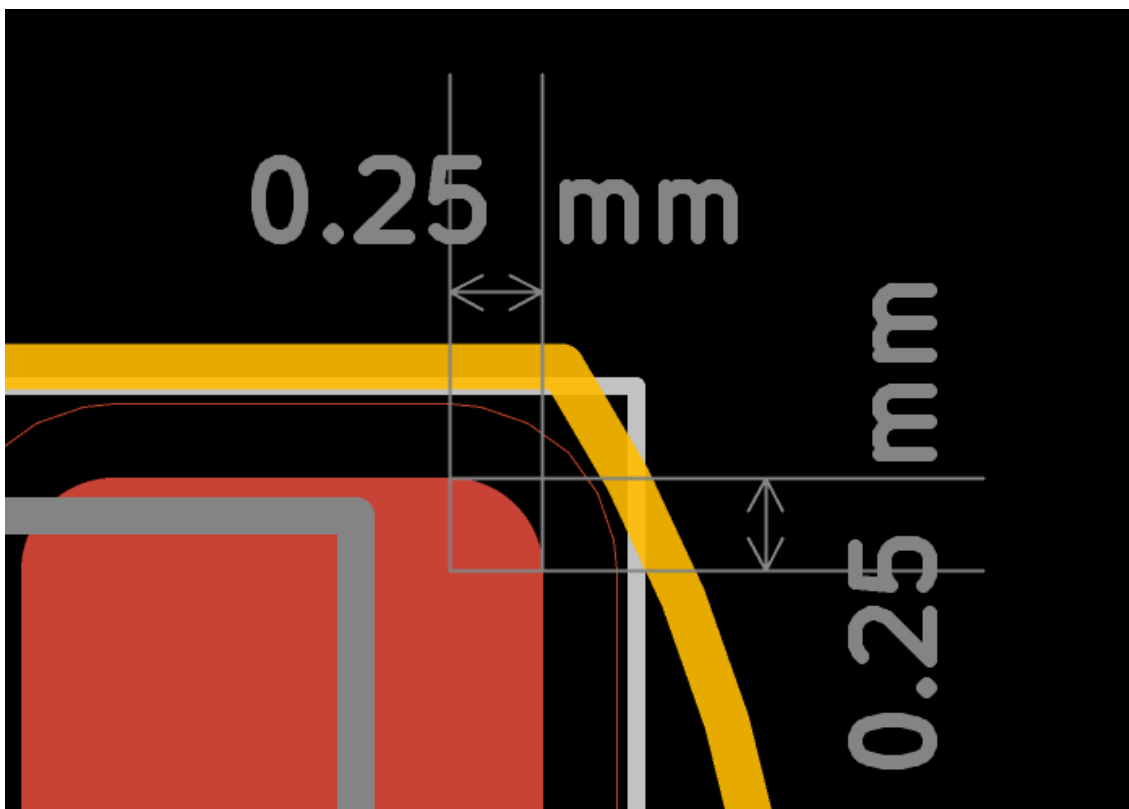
Closeup of an SMD pad with corner radius indicated.
